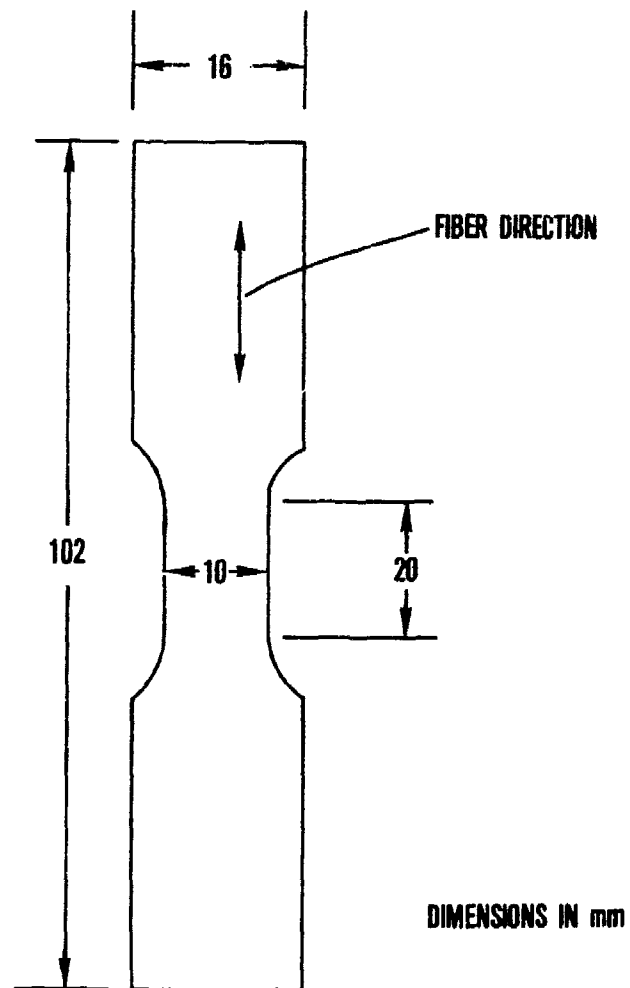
Drawing of Gr/Al Composite Fatigue Specimen
